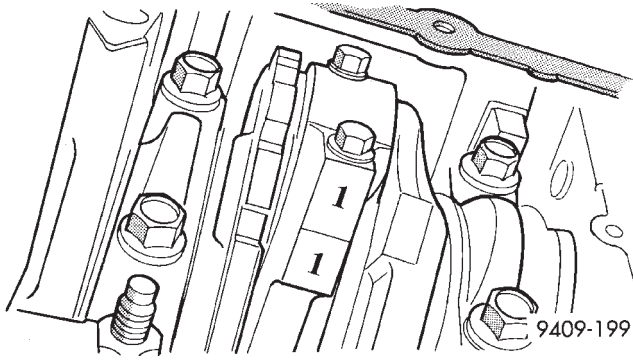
Identify Connecting Rod to Cylinder Position—Typical
